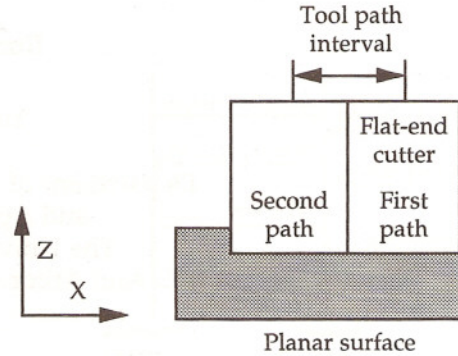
Planar surface machined by a flat-end cutter; the cutter paths are out of the page.
